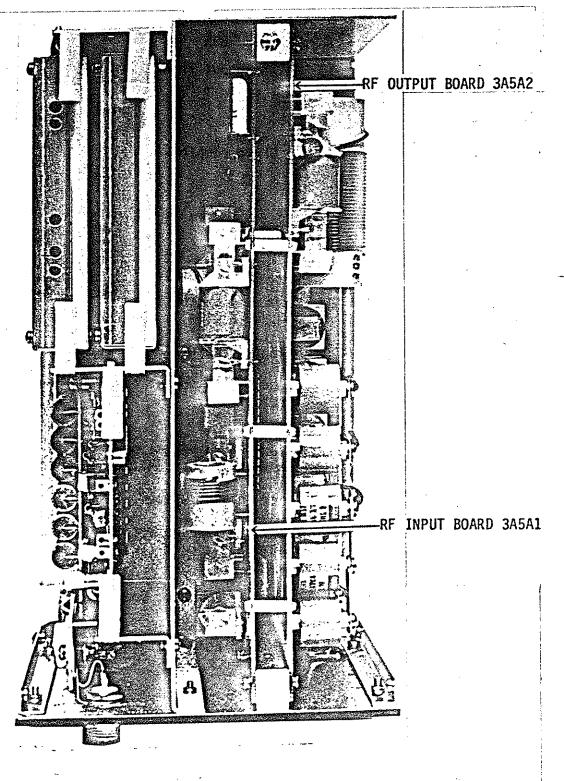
MAJOR ASSEMBLY AND COMPONENT LOCATIONS (Sheet 3 of 5)
